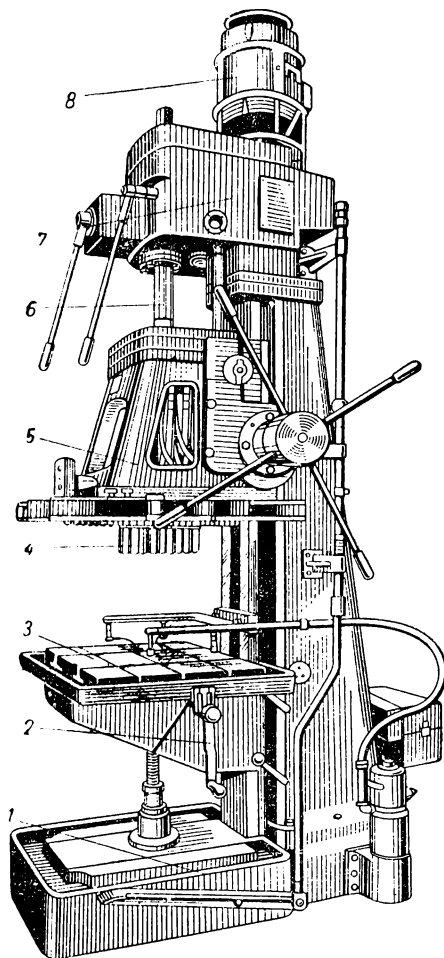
Adjustable-centres multiple-spindle vertical drilling machine
